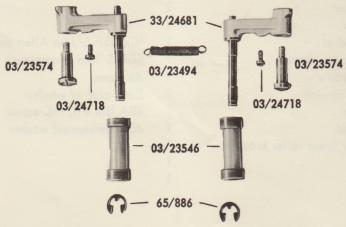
BOTTOM SPROCKET UNIT LESS ROLLERS
